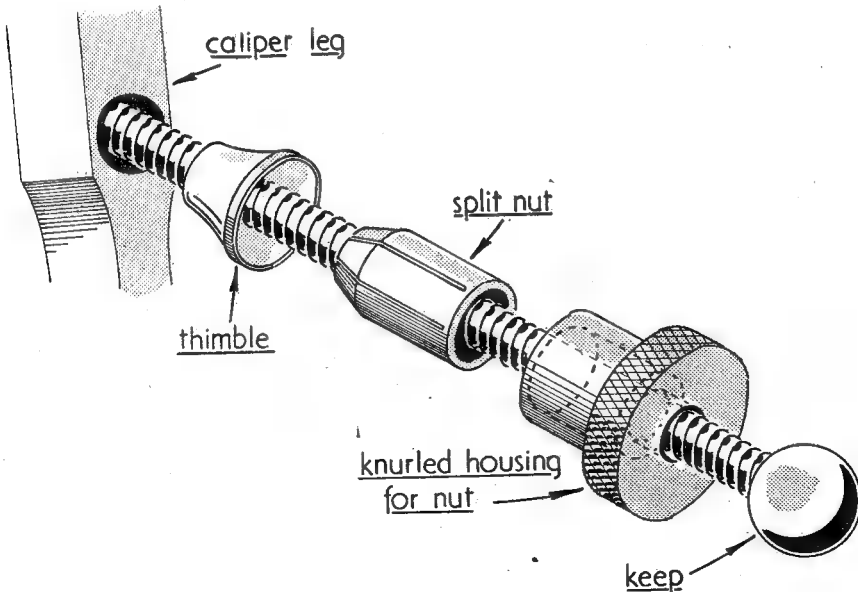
Illustrating the construction of a quick-acting adjustment nut
